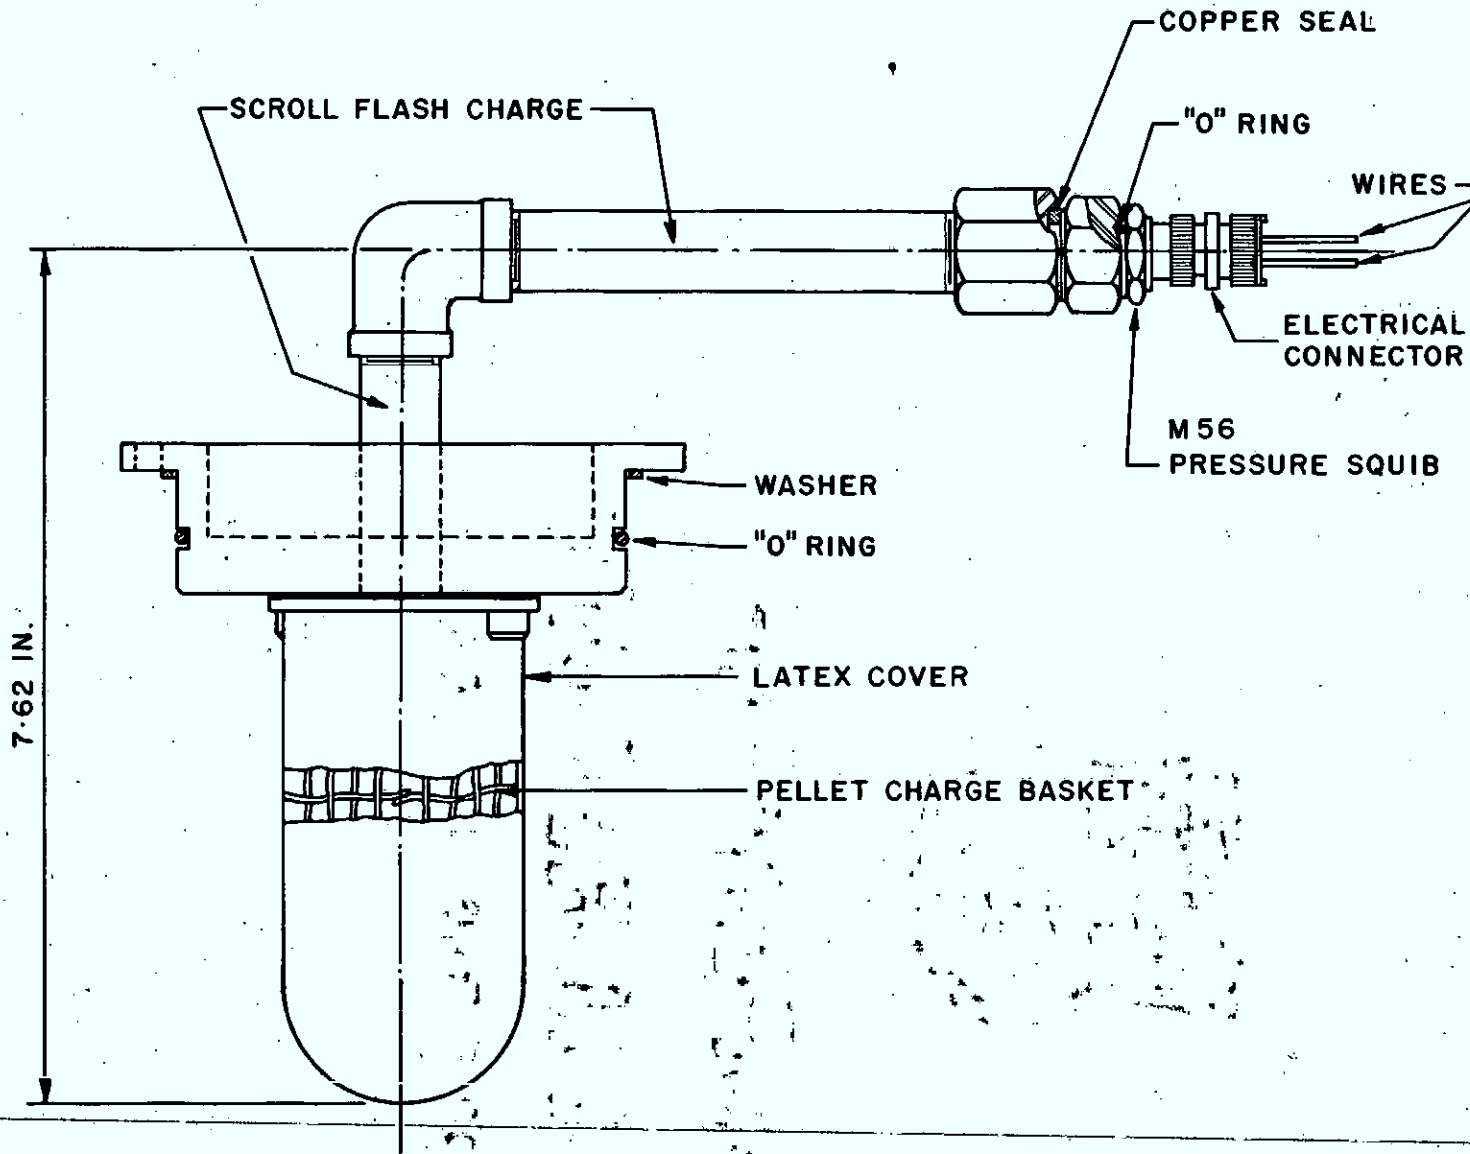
Schematic of 23KS25000 Rocket Motor Igniter
